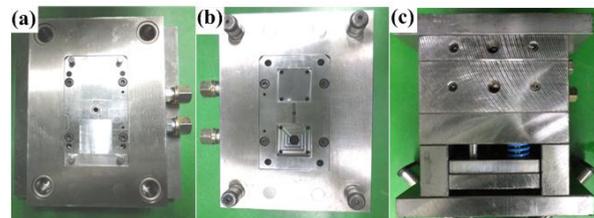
Plastic injection mold: a – cavity half; b – core half; c – assembly
